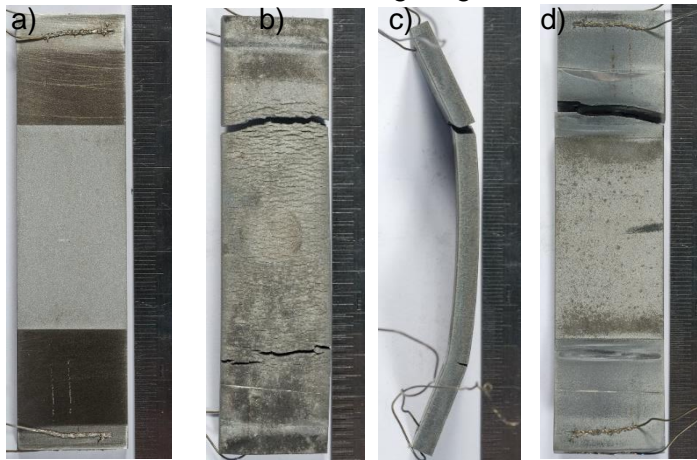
Cr-BS1 – the sample was tested inside non-stable corrosive environment. The bulk behavior is comparable to the BS2 sample but the corrosion changed drastically. a) As-cleaned and welded sample; b) Bottom surface under tension after the test; c) Side view with the shape of the crack; d) Top surface under compression during the test.
